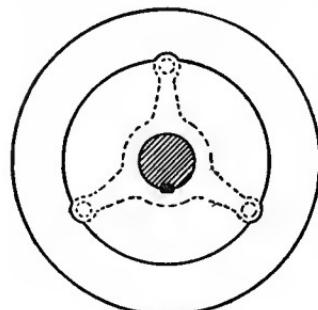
Core Discs Bolted to Spider—Bolts Placed Inside of Discs
